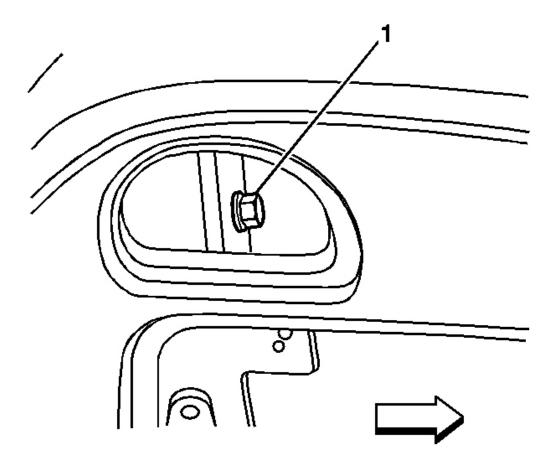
Locating Passenger Air Duct Extension Screw Courtesy of GENERAL MOTORS CORP.
